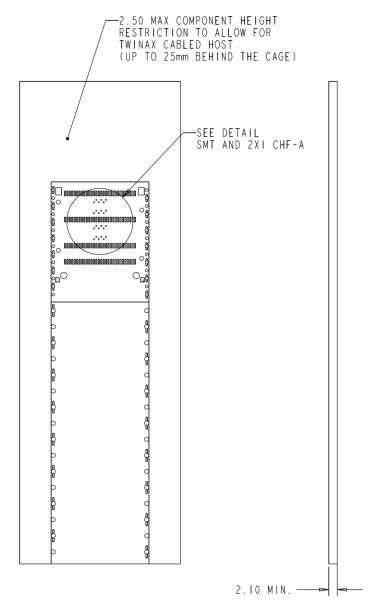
Belly to belly host footprint, top side stacked SMT and stacked cable B
